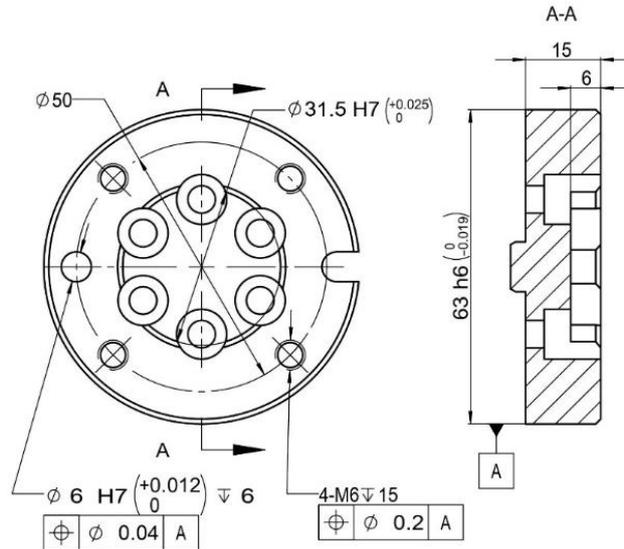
Diagram of the flange size of the wrist of the manipulator
